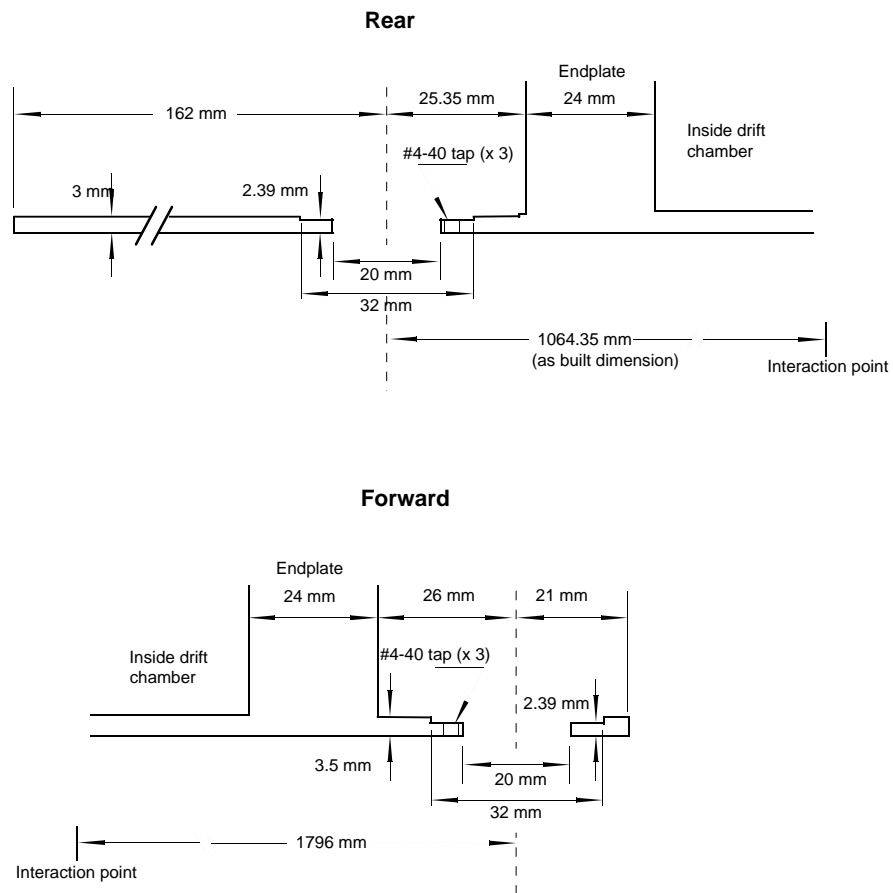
Penetration holes in drift chamber inner cylinder for sensor mounts.
